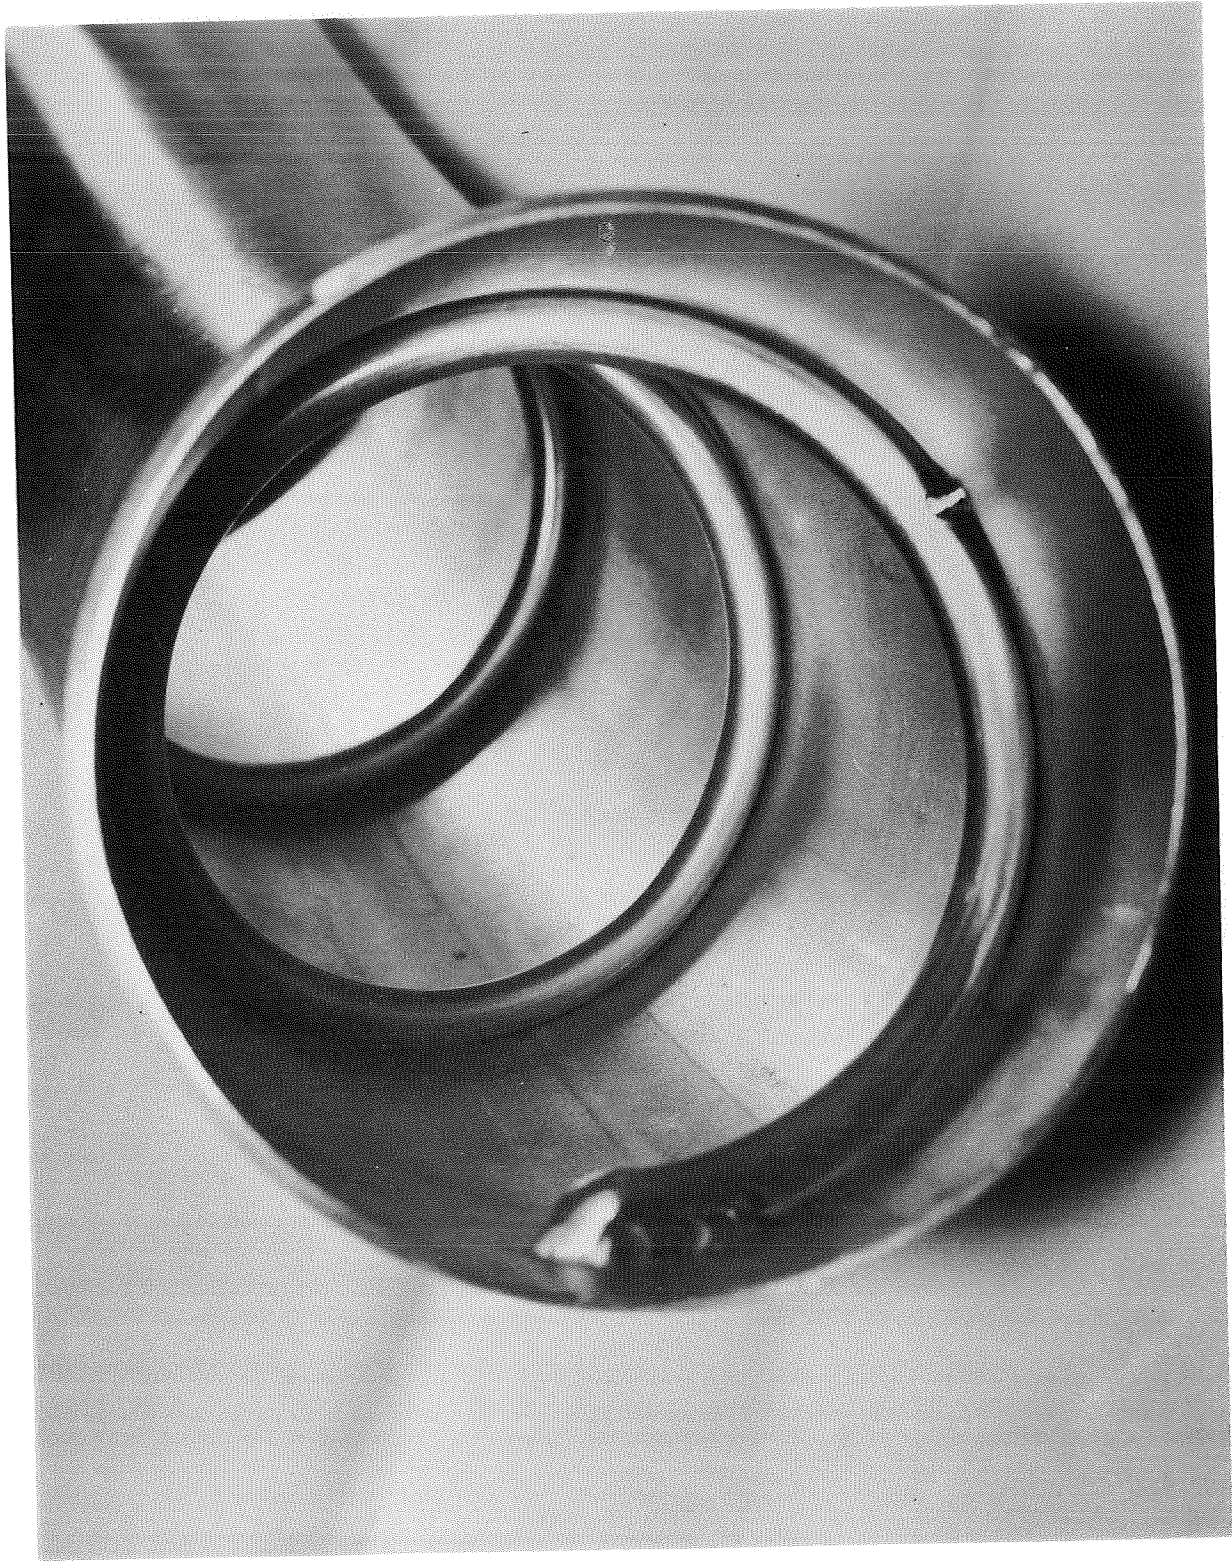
Partial View of Wire Coil Insert. (P70-4-7A)
